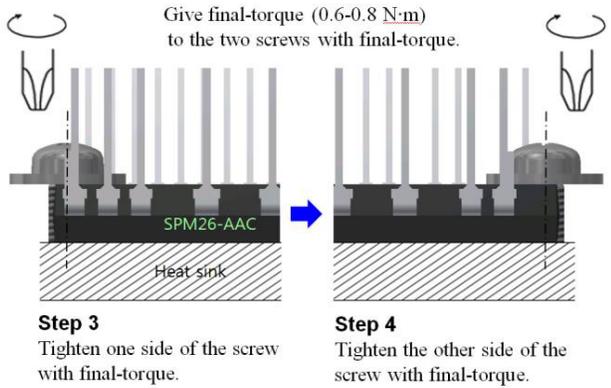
Illustration of Screw Clamping with Heat Sink (Method 2)
